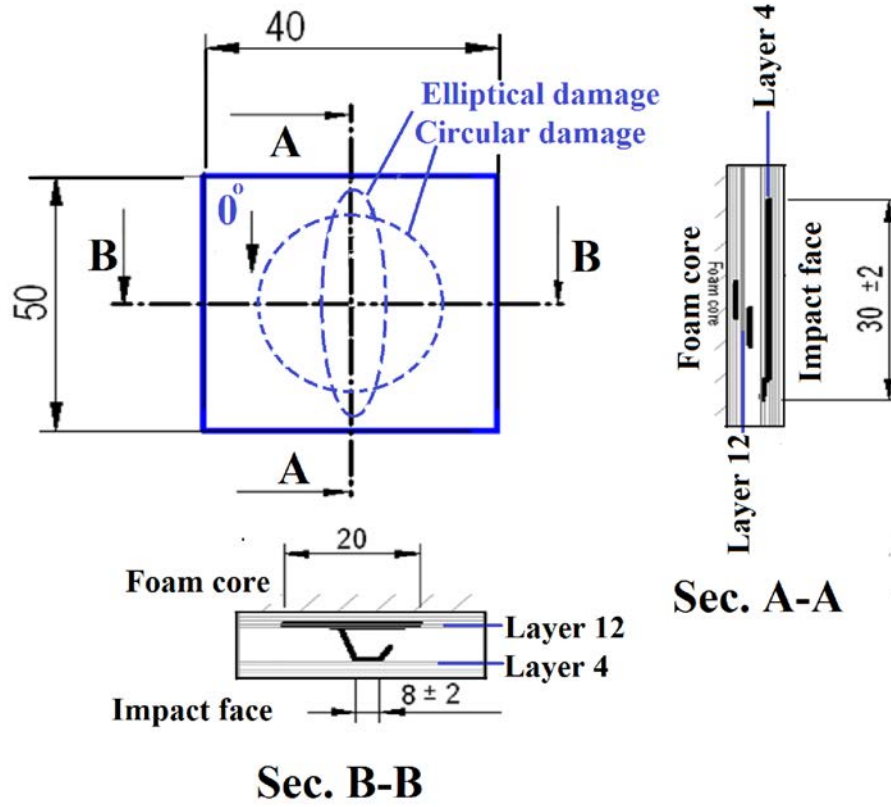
Sectional view of 20 mm core specimen damage.
